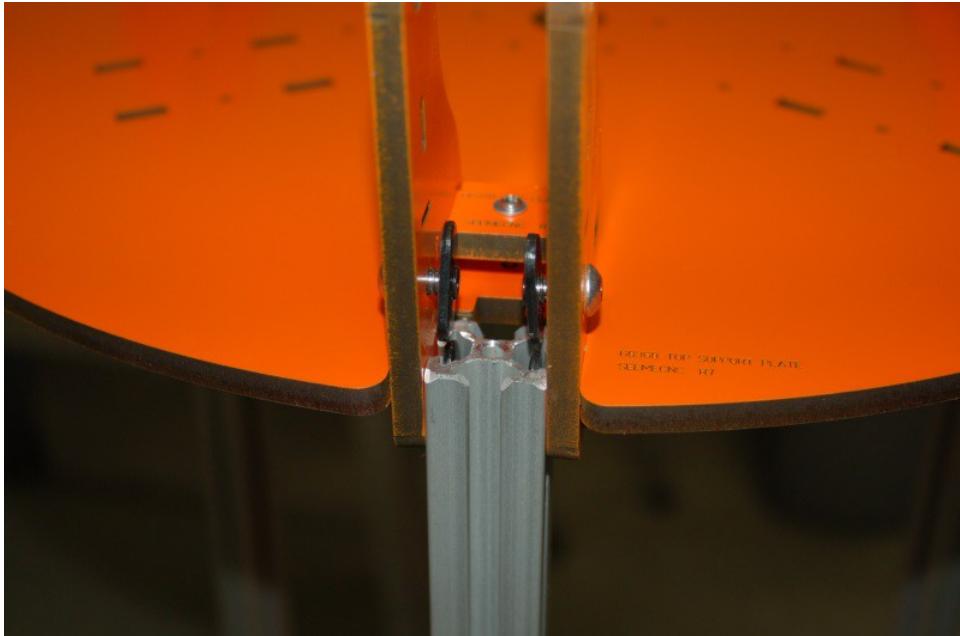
Setting the Idler Bracket into the tower extrusion.
